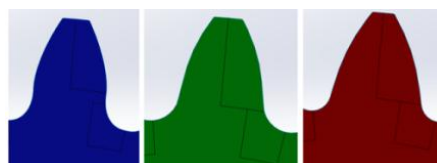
The geometry of analyzed gears: involute gear (blue), S-gear 1 (green), S-gear 2 (red)
